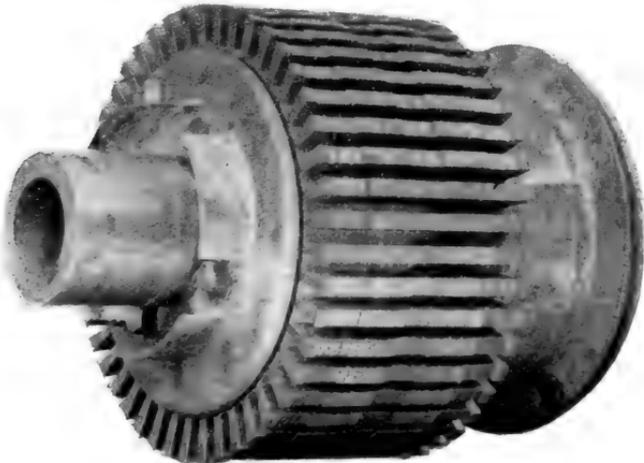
Complete Assembled Core of Machine by Alioth Co.
